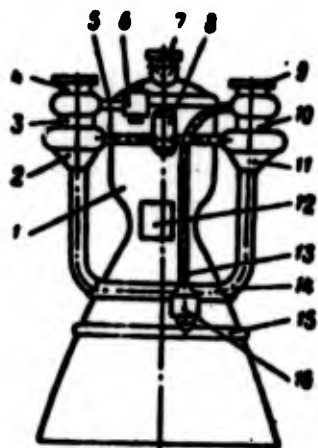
Diagram of a liquid-propellant rocket engine of frameless design. 1 - combustion chamber; 2 - exhaust collector; 3 - turbopump oxidizer unit; 4 - pipe oxidizer feed; 5 - main line of the oxidizer; 6 - main oxygen valve; 7 - spherical support; 8 - gas generator; 9 - fuel feed; 10 - turbopump unit of fuel; 11 - exhaust collector; 12 - power supply unit; 13 - main fuel line; 14 - exhaust collector; 15 - fuel collector; 16 - main fuel valve.
